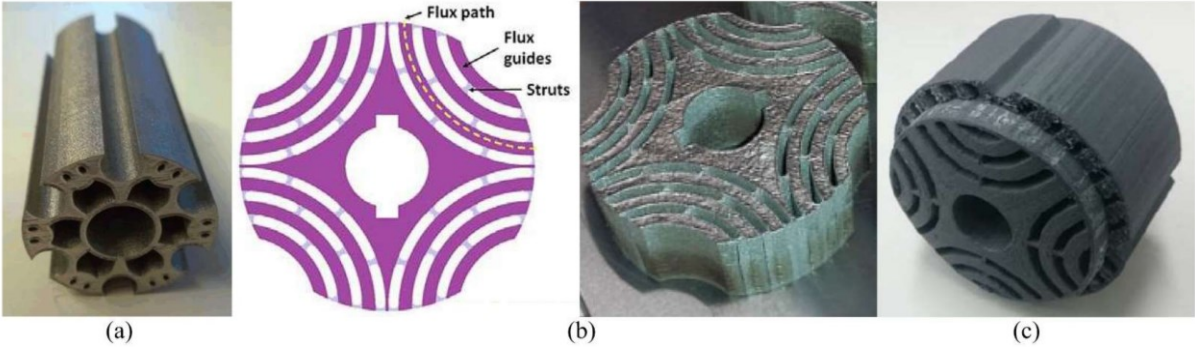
Additively Manufactured Cores for Electrical Machines: (a) Rotor Prototype for an SRM with High-Saturation Flux Density [80], (b) SLM-Built Rotor with Non-Magnetic Bridges [81], (c) Rotor and Stator Core Packs for a Line-Start Synchronous Reluctance Mach [28]
